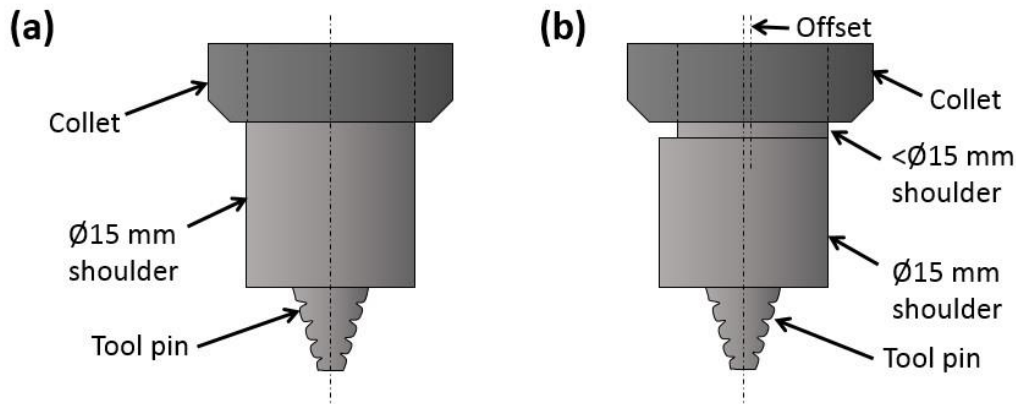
Tool design for (a) aligned and (b) eccentric setup, where collet centreline is at an offset from tool centreline.
